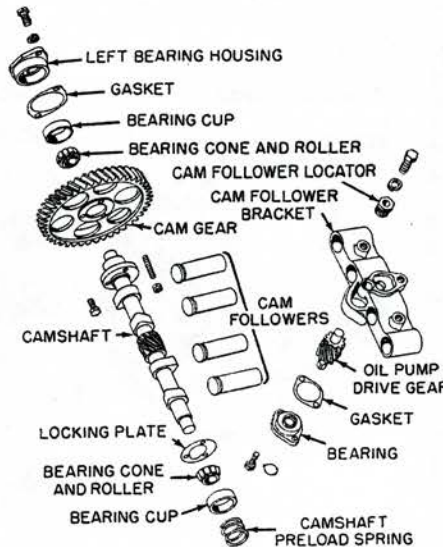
A Exploded view of Model 60 camshaft and related parts. Model 50 is similar
